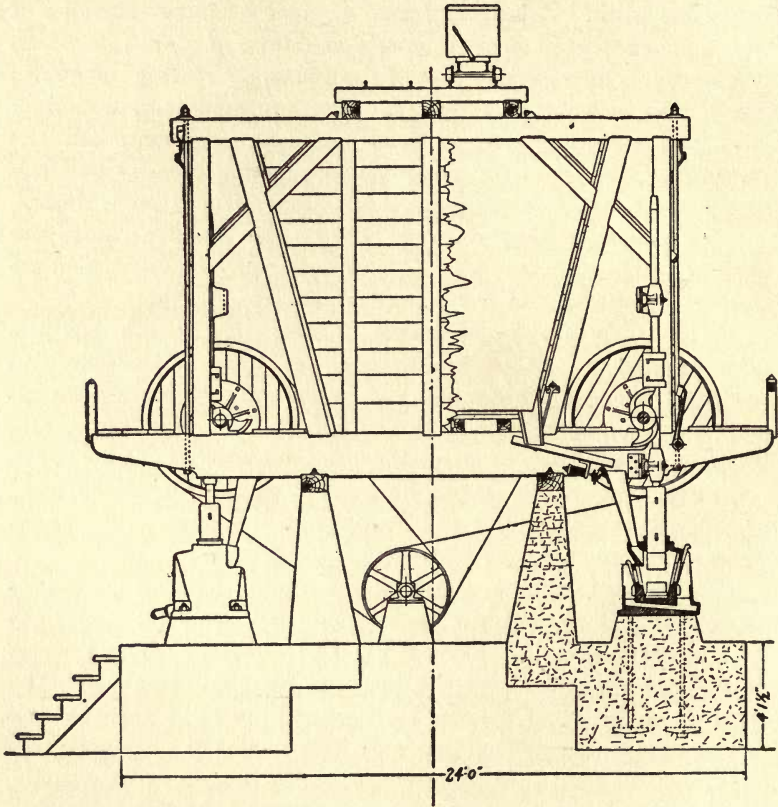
Cantilever Battery Frame, Wood Construction.
